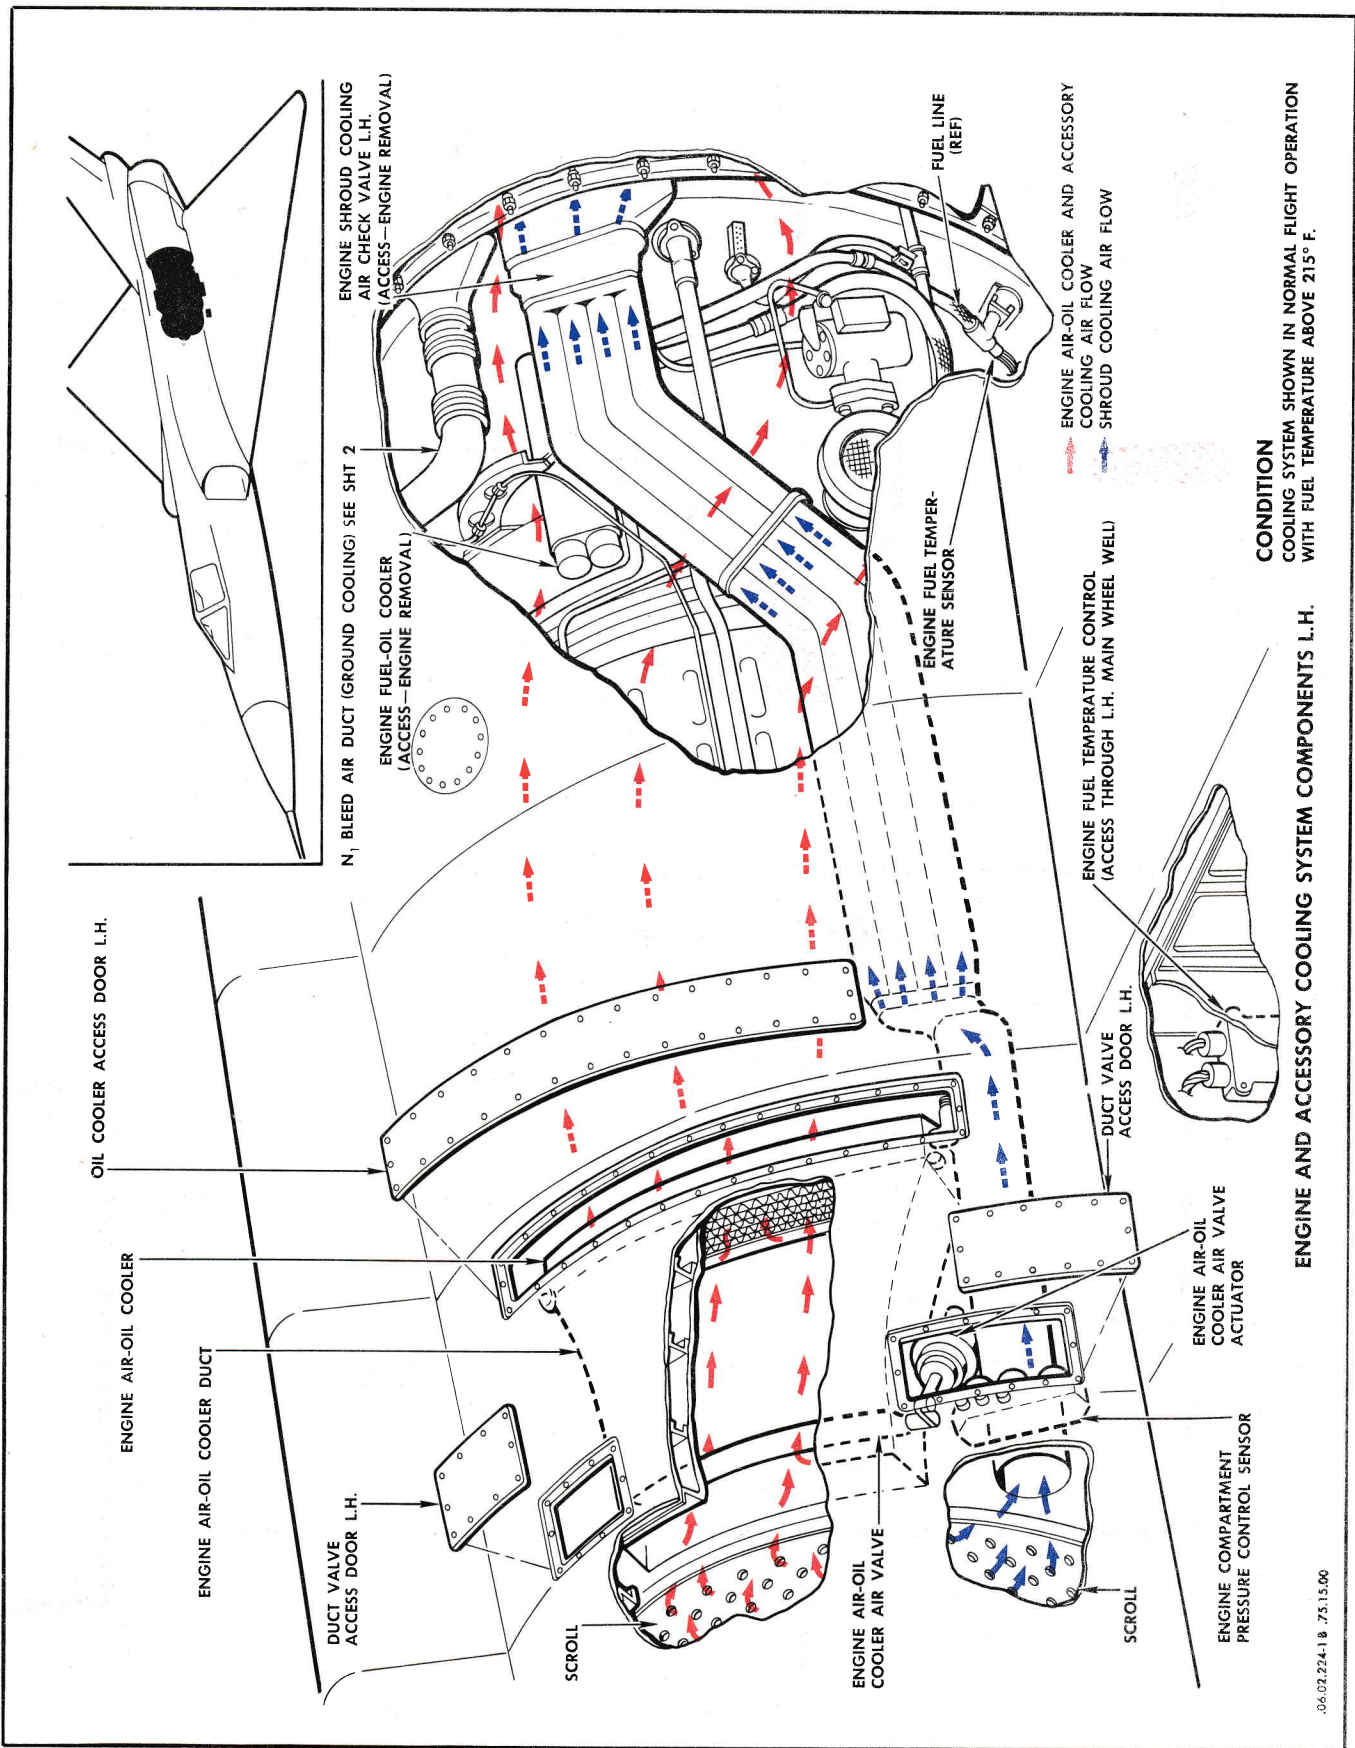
Engine and Accessory Cooling System (Sheet 1 of 2)
